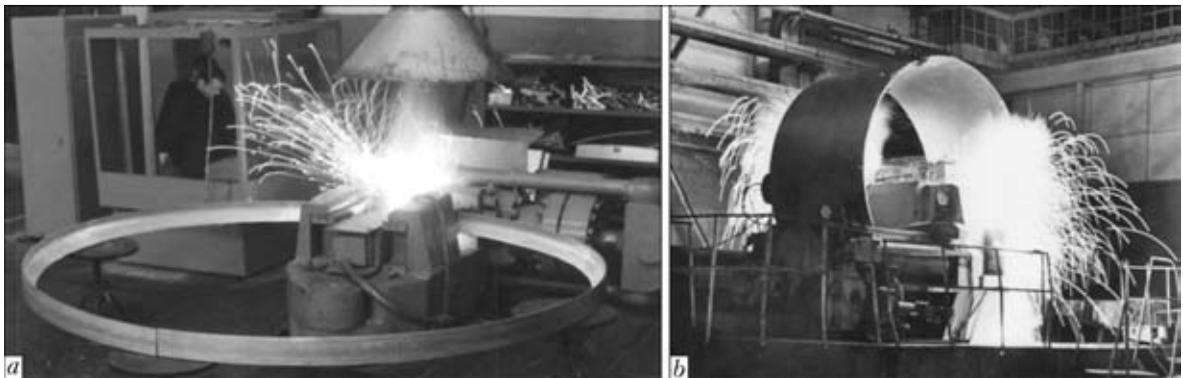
FBW of frame rings in machine K393 (a) and shells in machine K767 (b)
